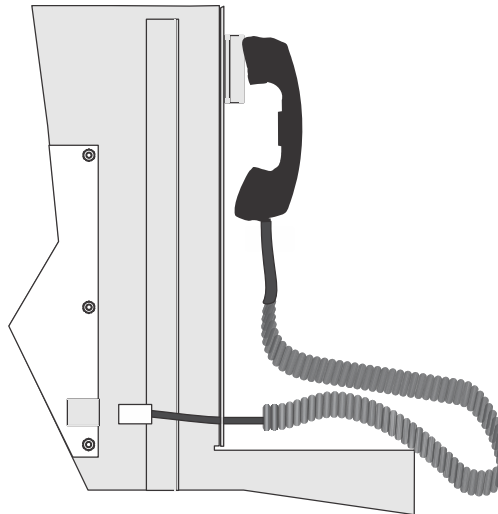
Handset Cord Inserted Through Dead Front Panel Hole
